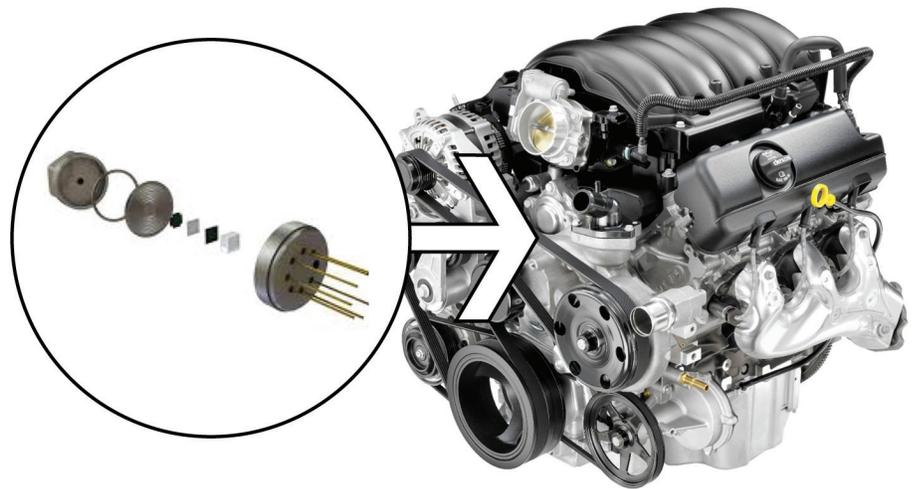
Exploded view of microelectronic sensor for automotive engine applications.
